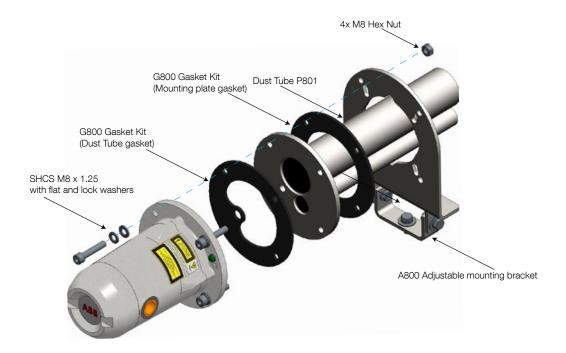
P801 Dust Tube and A800 Adjustable Mounting Bracket assembly
